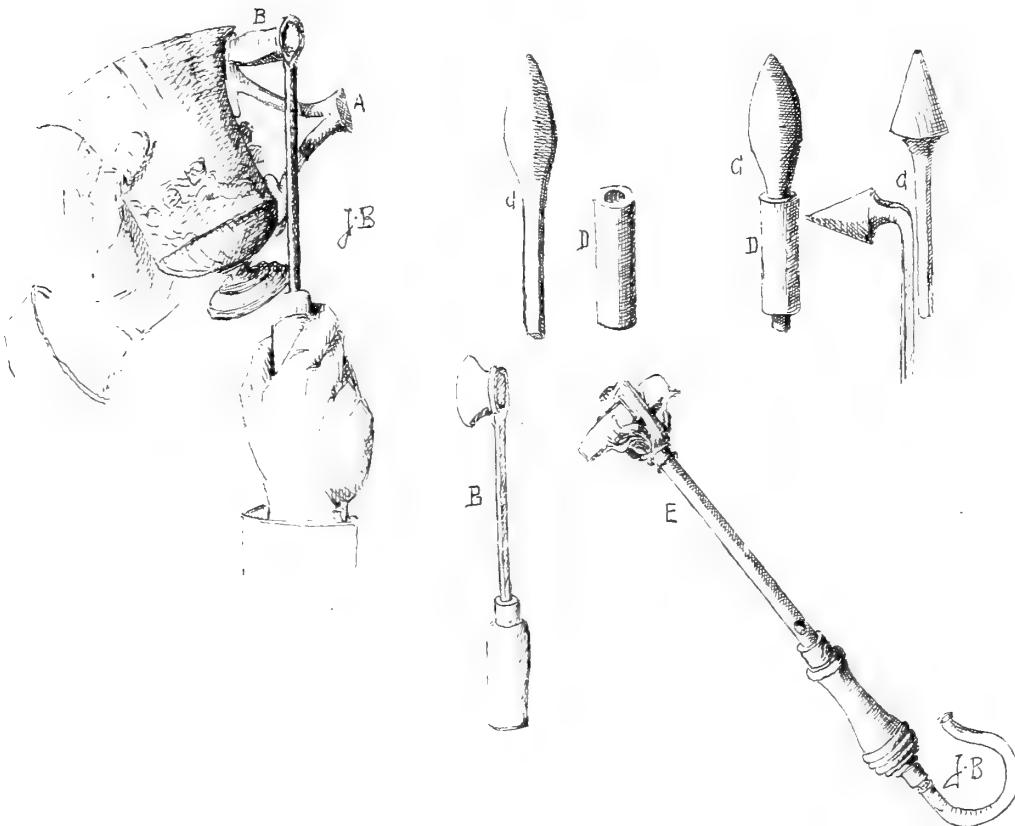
Different kinds of soldering irons. A, pewter cast after founding; BB, soldering irons in copper; CCC, soldering irons in iron; D, wood handle; E, soldering iron in copper for gas heat.
